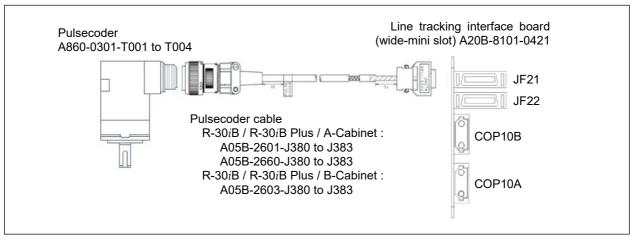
(a) Connecting cables with Line tracking interface board A05B-2600-J035, A05B-2660-J035 (one Pulsecoder)
